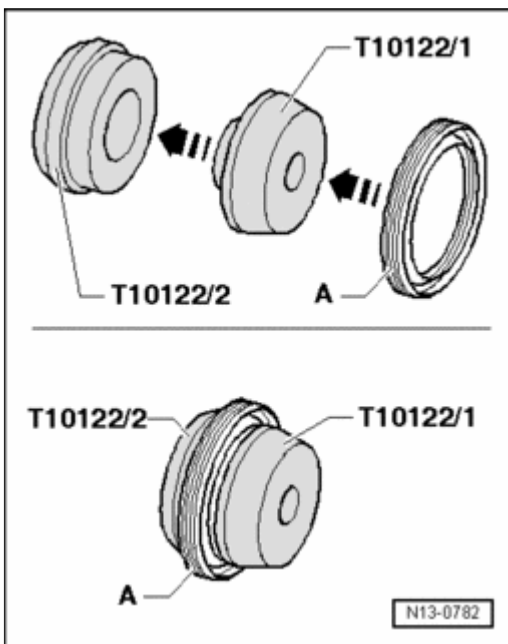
Inserting Assembly Device T10122/1 Onto Pull Sleeve T10122/2 And Shaft Seal Onto Pull Sleeve
